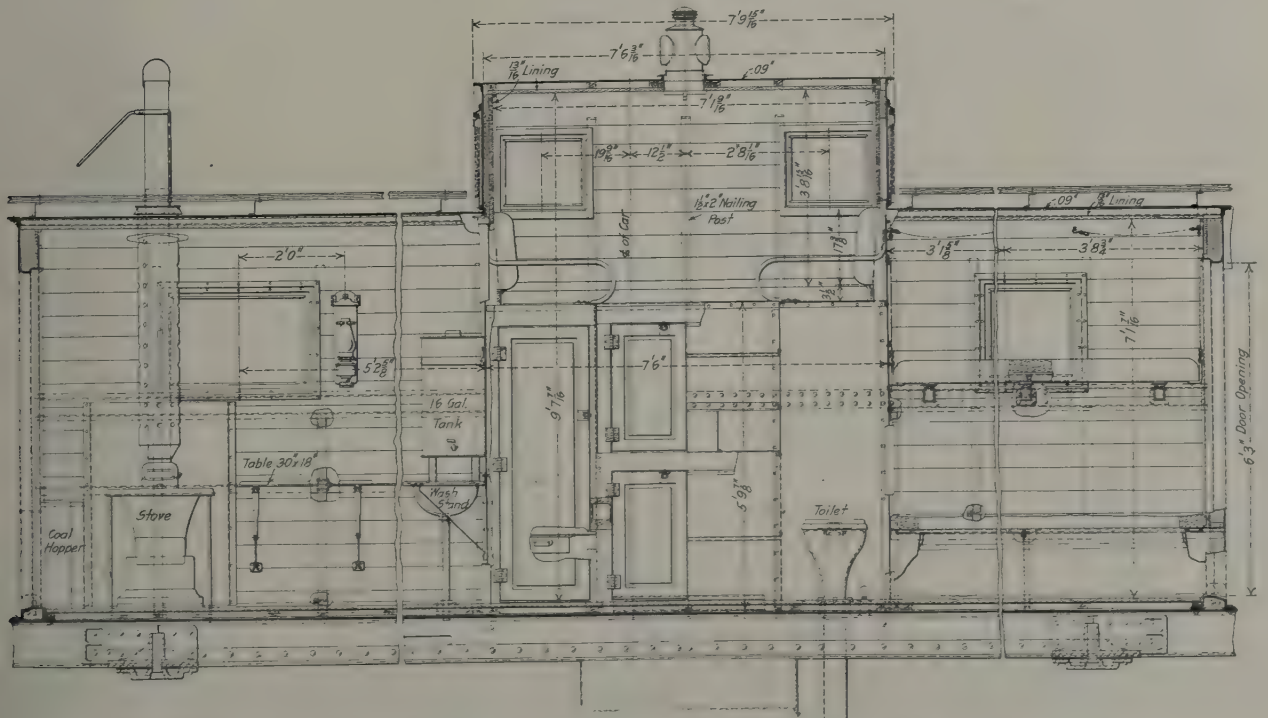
Longitudinal Section Through Pennsylvania Railroad Steel Caboose Shown in Figs. 249-251 and 254-255.
